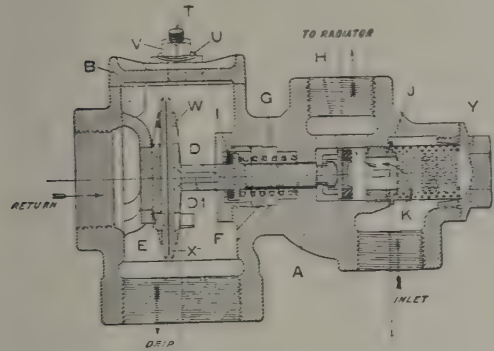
Sectional View Gold Vapor Valve No. 1112.
